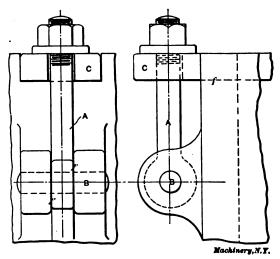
Eye-bolt used for Clamping Drill Jig Leaf
